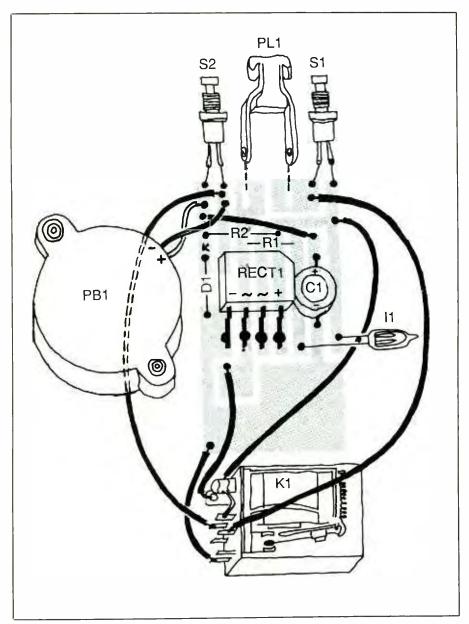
Wiring diagram for pc board. Note that all components mount on the copper-trace side of the board.
